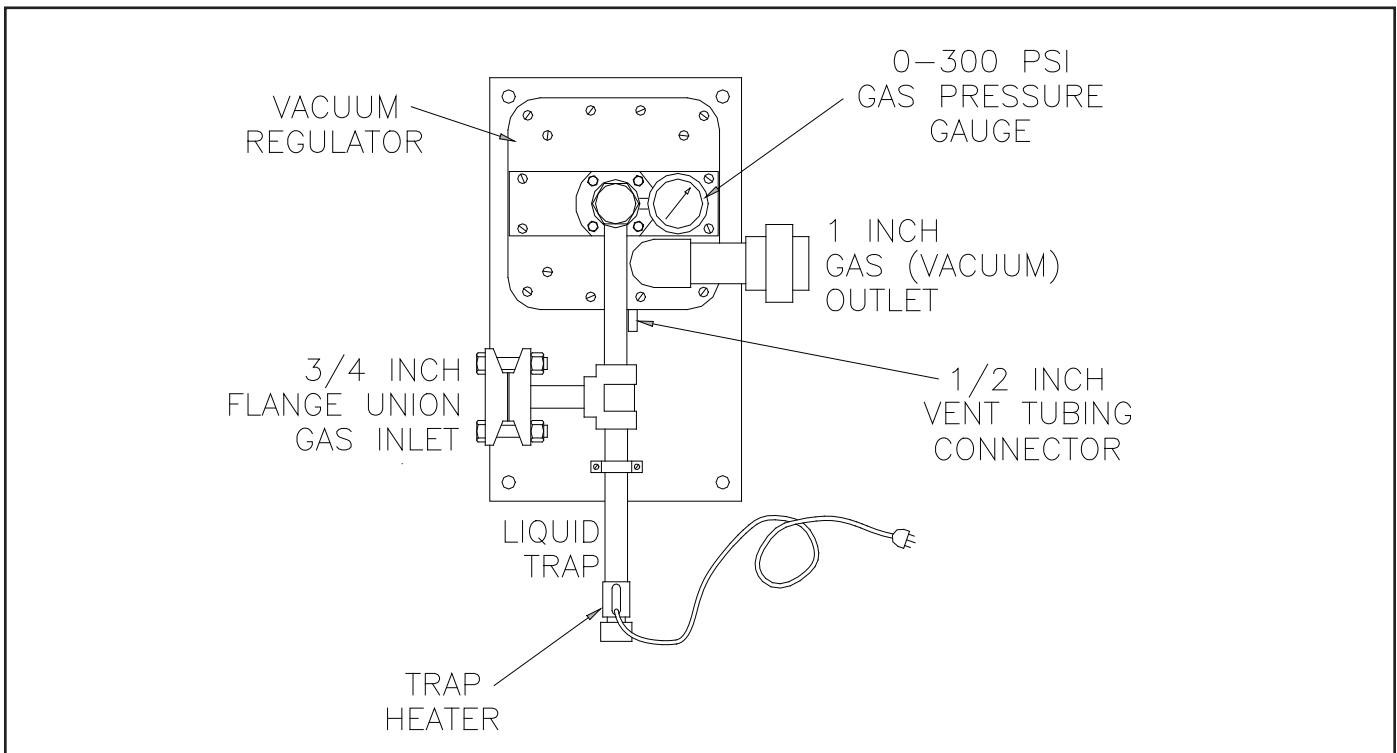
2000 PPD (40 kg/h) Vacuum Regulator Assembly
